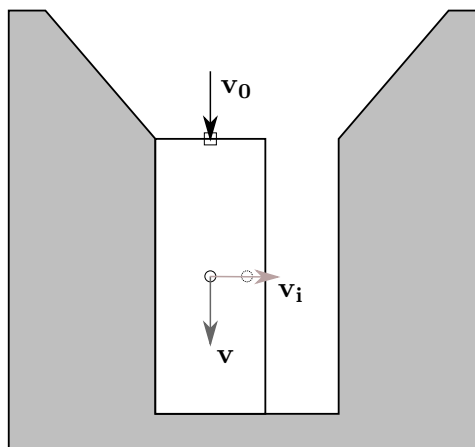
Extremal Associated with Successful Assembly. Extremal which requires a motion impossible to be achieved with a passive mechanism and can be considered proper assembly.
